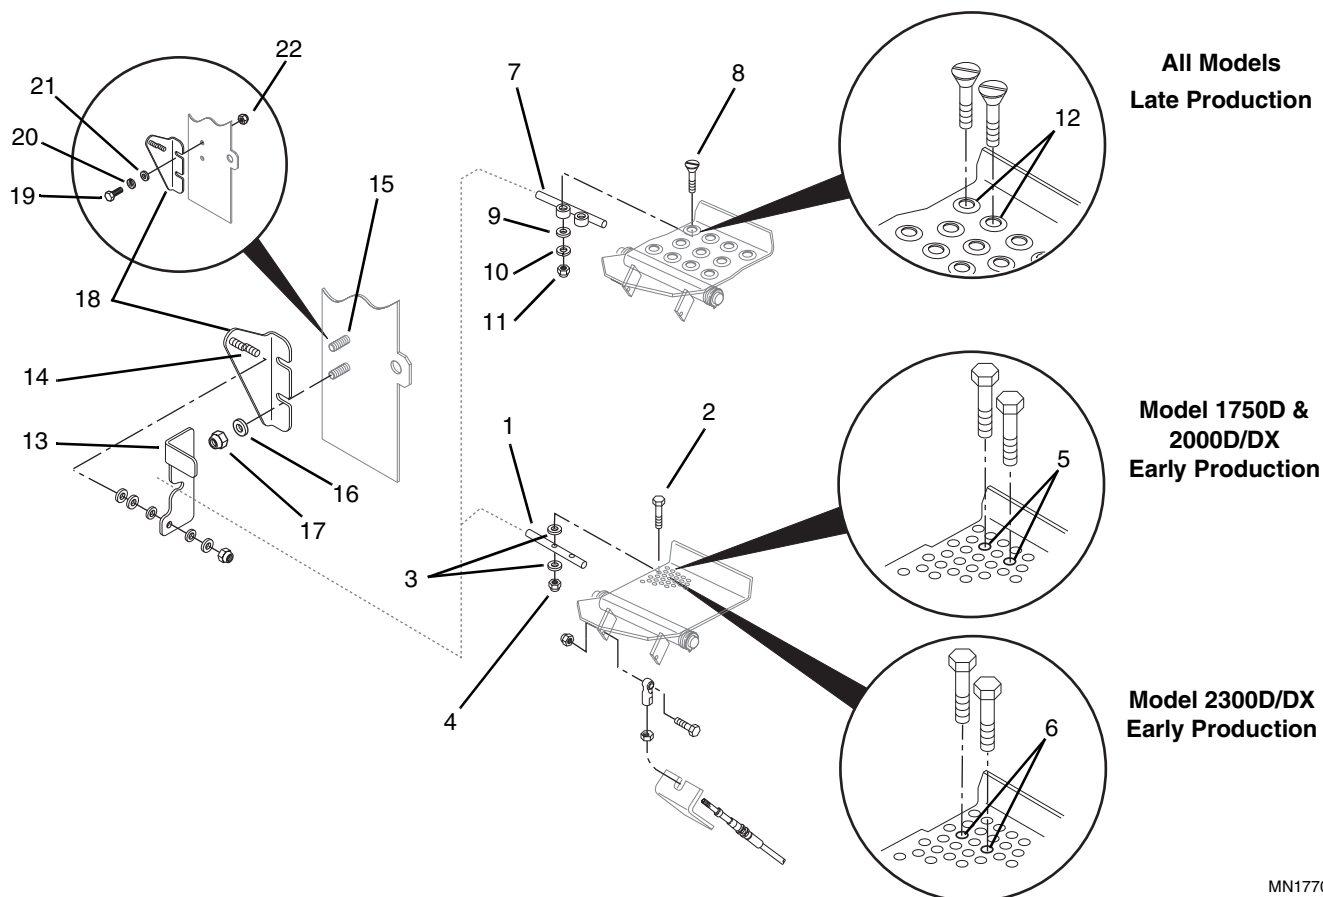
Optional Auxiliary Hydraulic Lockout Latch
